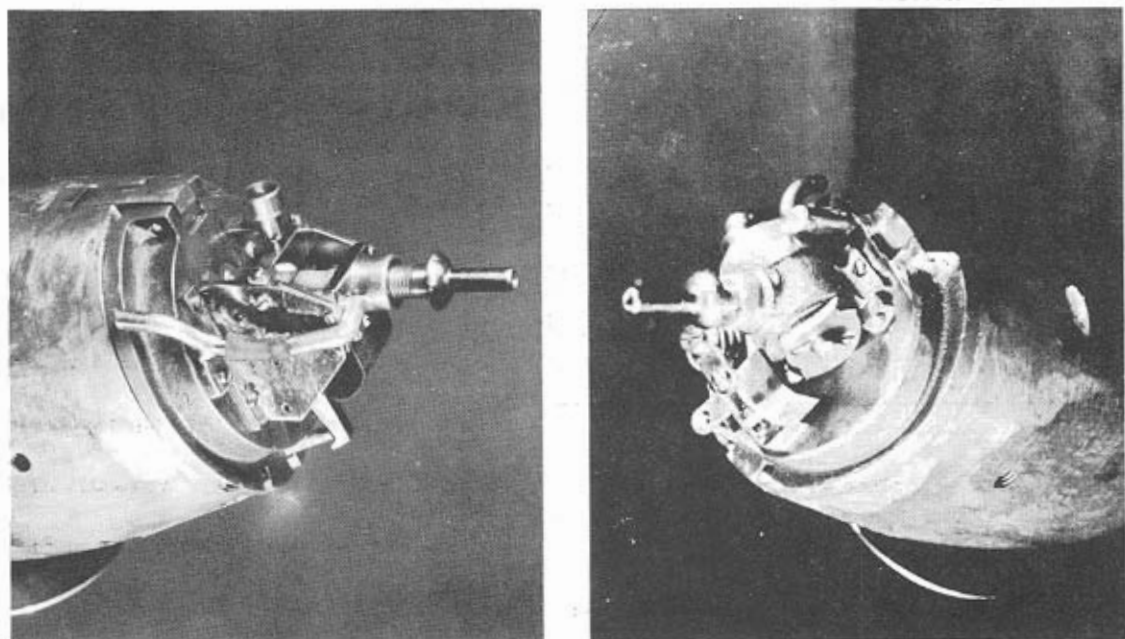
Auxiliary heads for fourth sampler with covers removed
